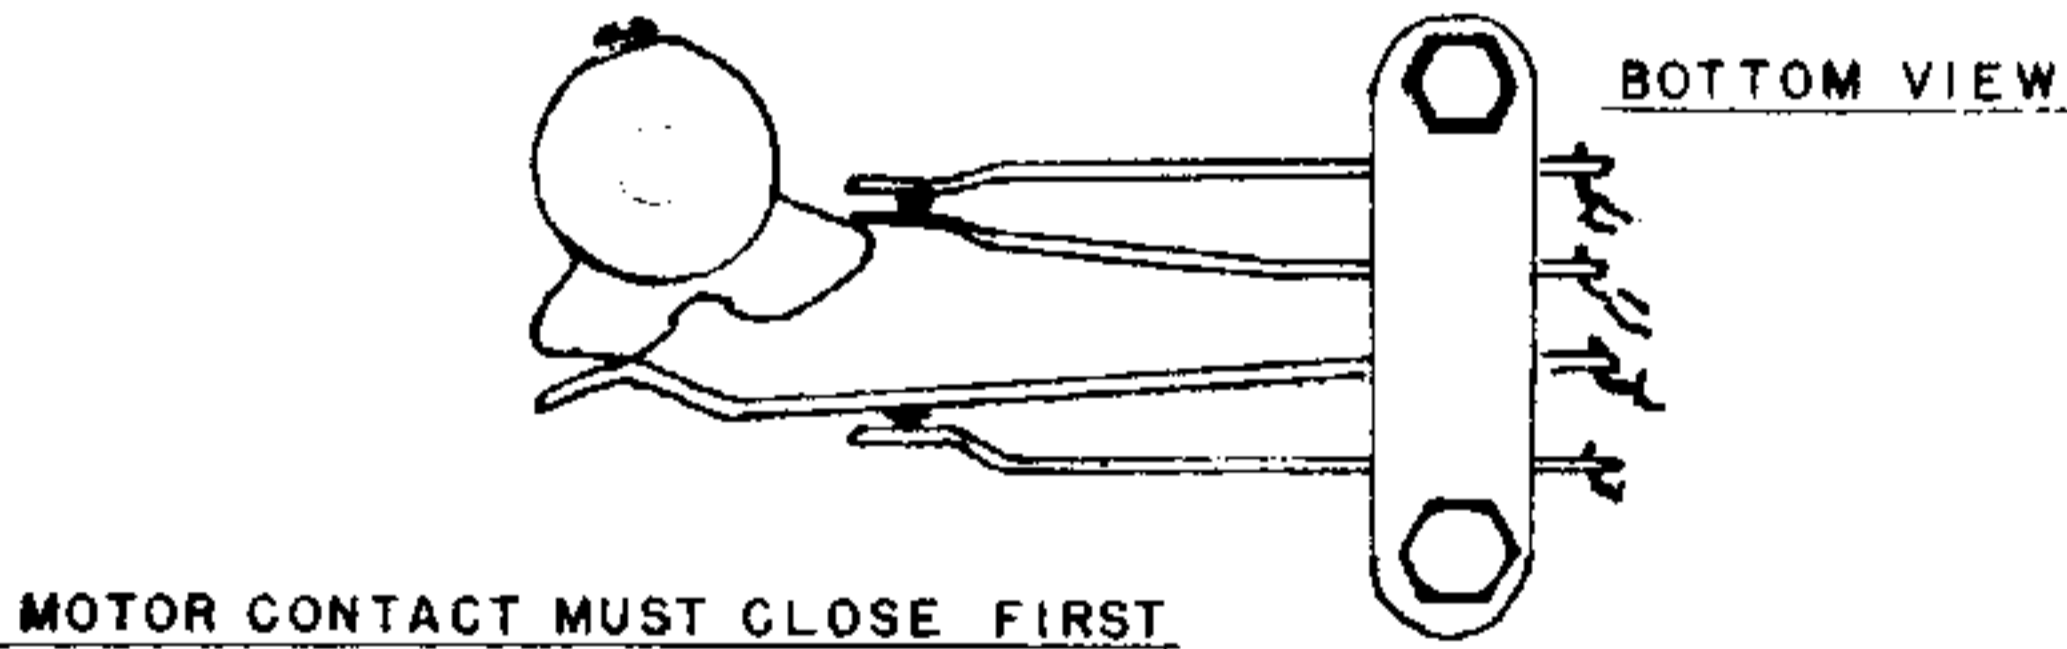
MOTOR CONTROL SWITCH — "RUN" POSITION
